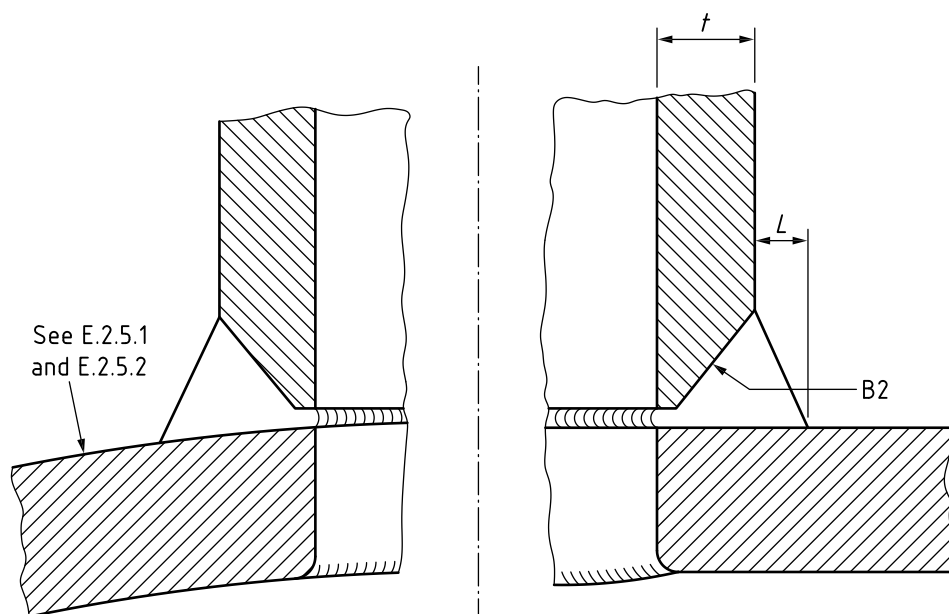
Weld details for set-in branches (*continued*)
